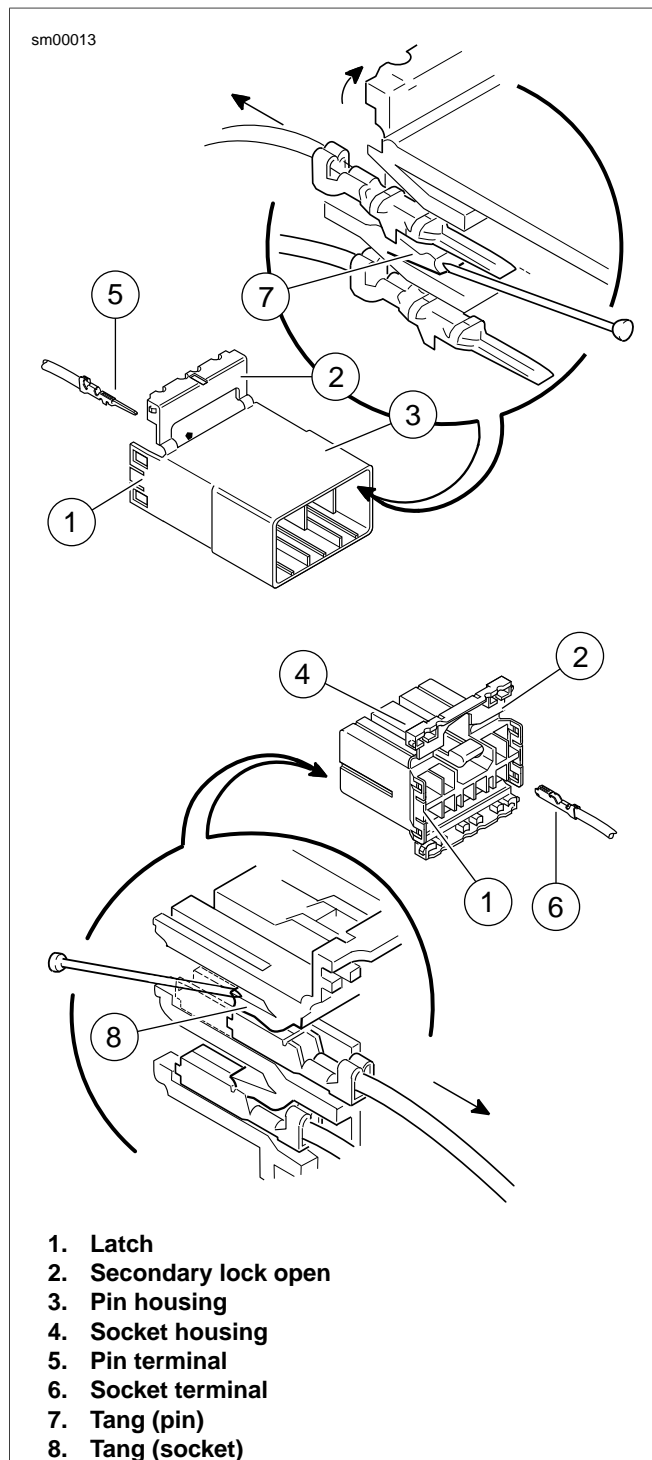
AMP Multilock Connector: Socket and Pin Housings
